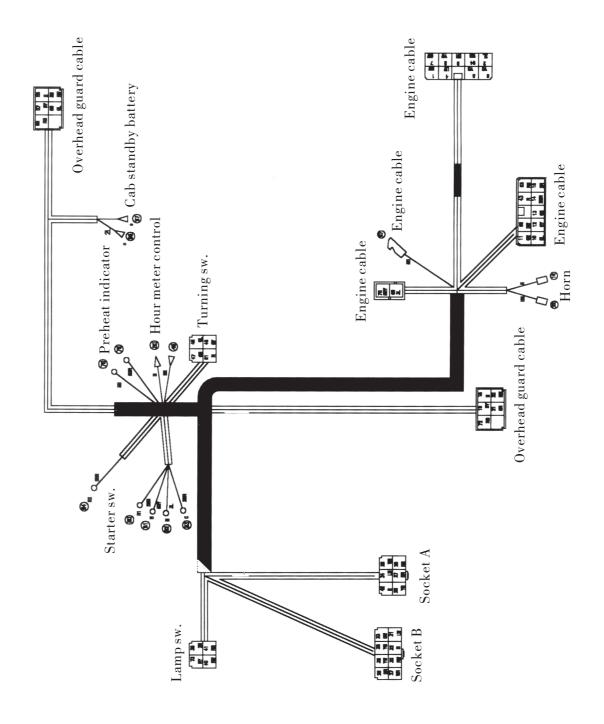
Engine wire harness. CPCD50-70-Xs
